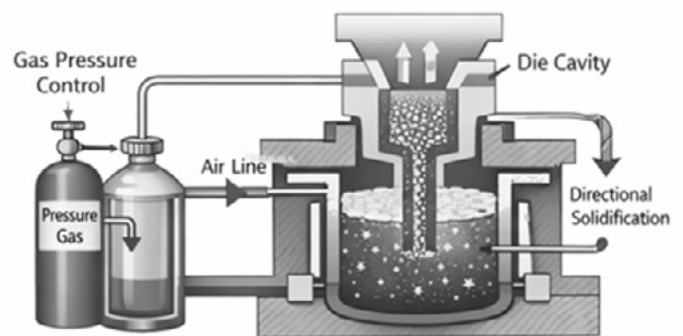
Low pressure die casting set up for aluminum metal matrix composite processing
